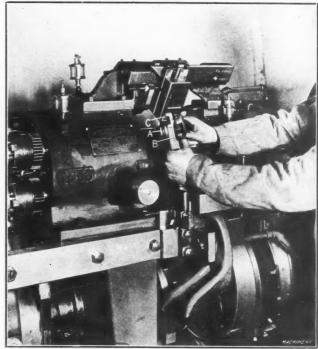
Setting the Cutting Edge of the Circular Forming Tool to the Proper Height with the Tool-setting Gage
